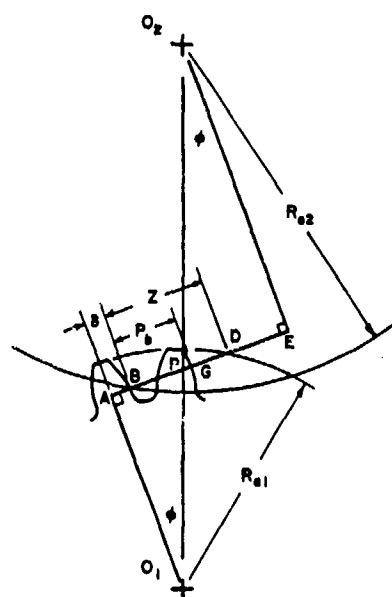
Highest point of single tooth contact for an external gear mesh.
